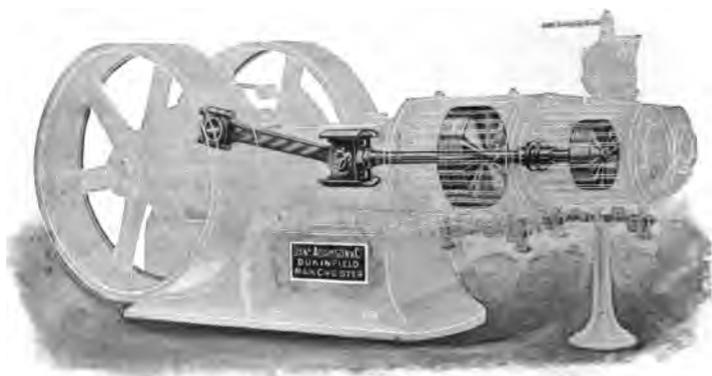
"IDEAL" ENGINE—VIEW SHOWING WATER PACKING, PISTONS, SLIPPER AND CONNECTING ROD.
